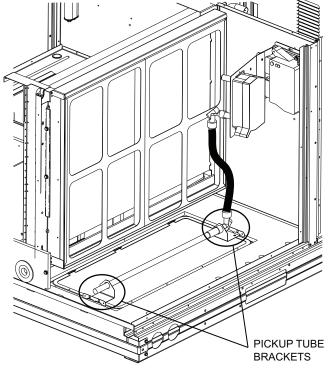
Pickup Tube Bracket for Vertical Duct Configuration
